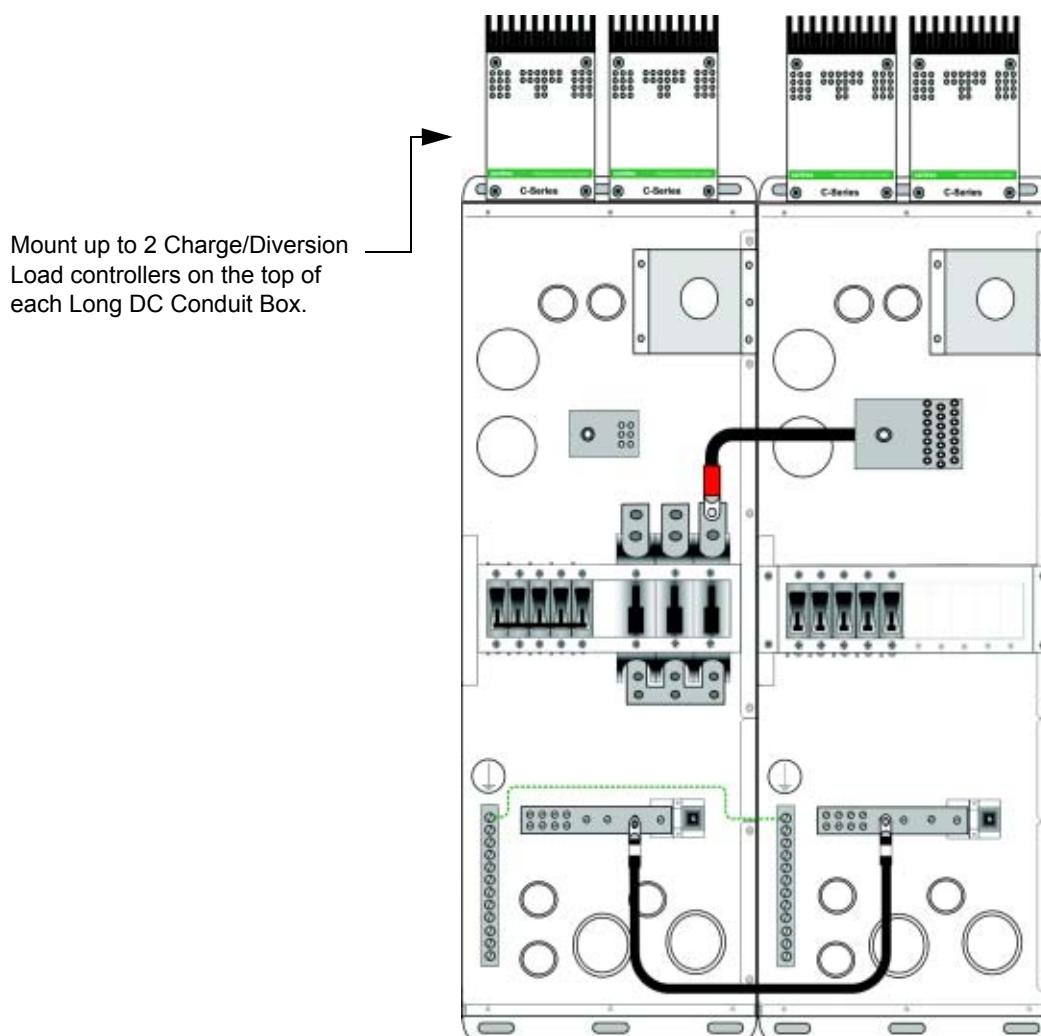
Adding Charge or Diversion Load Controllers on the Long DC Conduit Box
